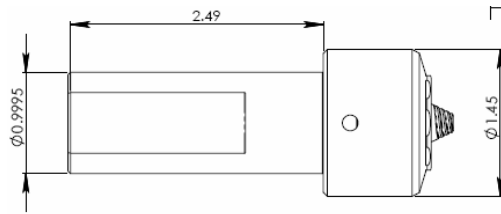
Design of the BN tool bit used for FSW, dimensions in inches.
